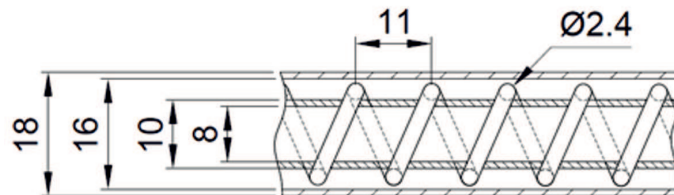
Turbulator dimensions and cross-section of the apparatus with a view of the helical turbulent element.
